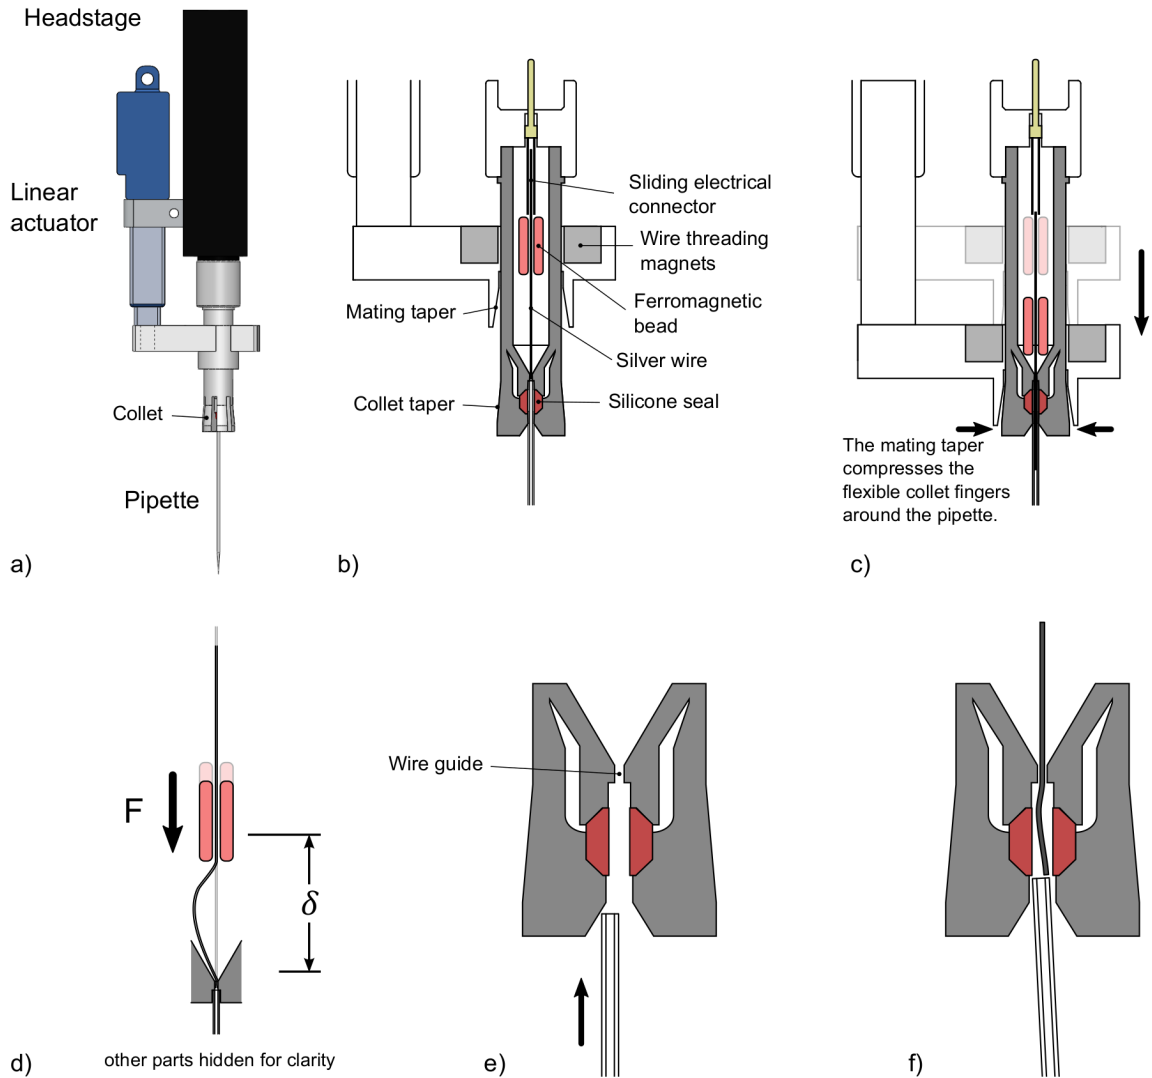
Schematic showing the function of the first pipette holder prototype. (a) The assembled design. (b) Labeled cross section of the holder. In (c) the linear actuator lowers the magnets and mating taper, inserting the silver wire and compressing the collet. The magnets exert a force on the ferromagnetic bead, pushing the wire into the pipette. The sliding electrical contact maintains an electrical connection with the amplifier as the wire is threaded. (d) Shows a common wire buckling failure. Because the total threaded length of the wire is under compression (δ), it buckles easily even with the minor friction forces at the wire guide. The holder must be completely disassembled to straighten the crushed wire. (e) Shows the sharp edges on the pipette getting caught on the wall of the collet and on the silicone seal (f) during insertion. These prevent the pipette from seating completely against the wire guide. (f) Shows also shows the silver wire buckling and failing to thread if the pipette is not inserted completely, another catastrophic failure.
